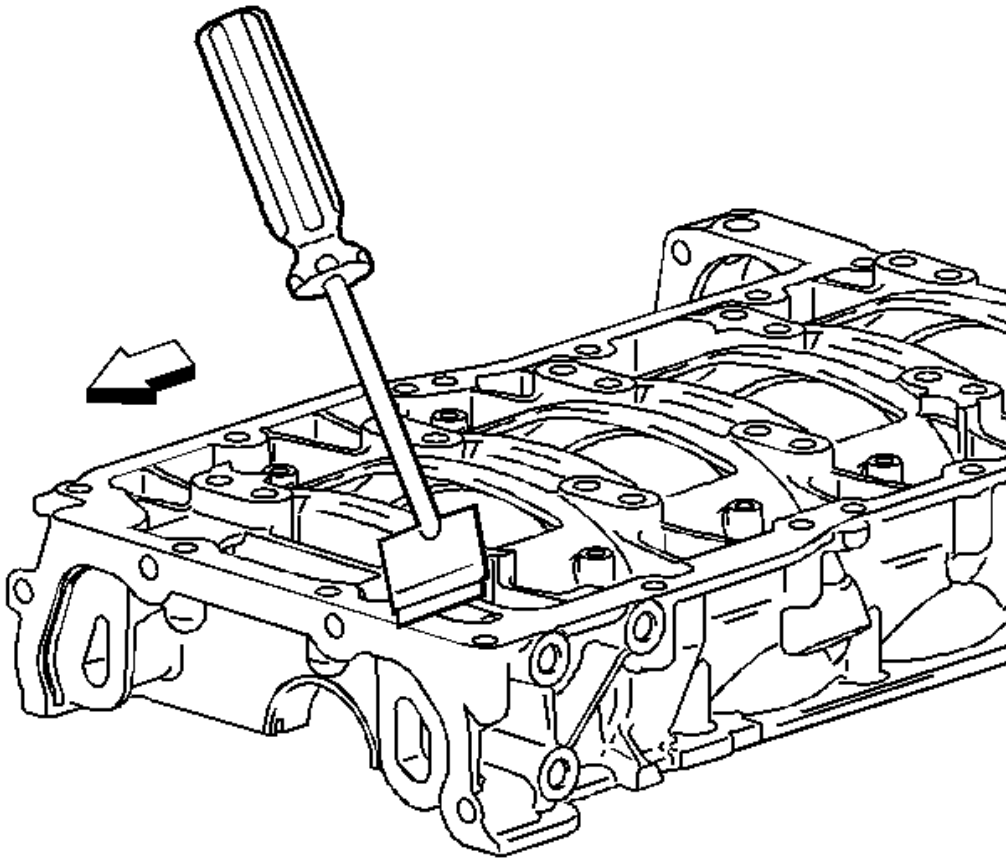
View of Gasket Mating Surfaces on Lower Crankcase Oil Pan Side
